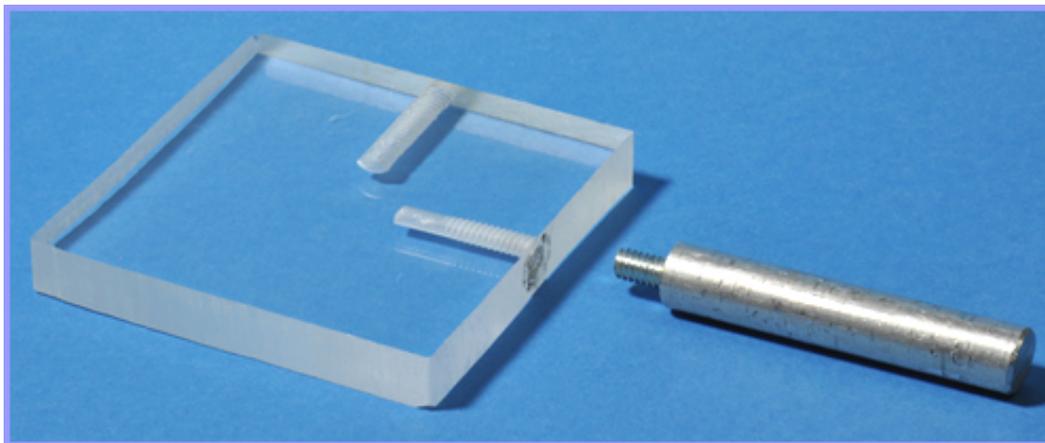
Large mirror mount cut to size, tapped, and unpainted.
